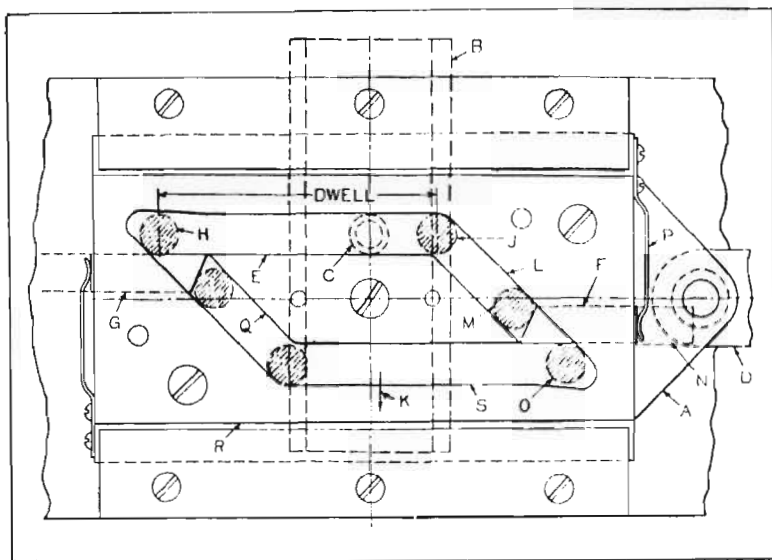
Reciprocating Slide Mechanism for Operating Tool-slide
